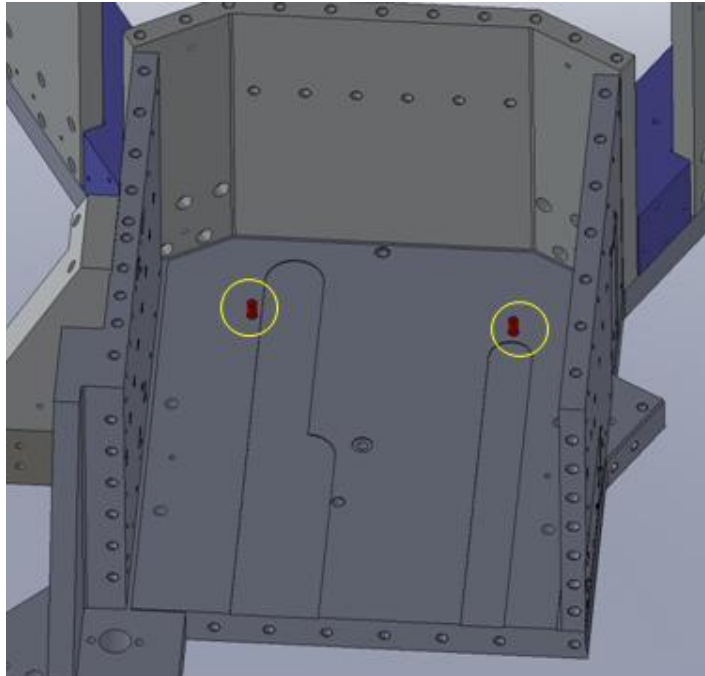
Locations of the (2) dowel pins in D0902279 Stage 1 Base Plate used to locate D0900648 Trillium Pod Assembly (there are no cut-outs)
